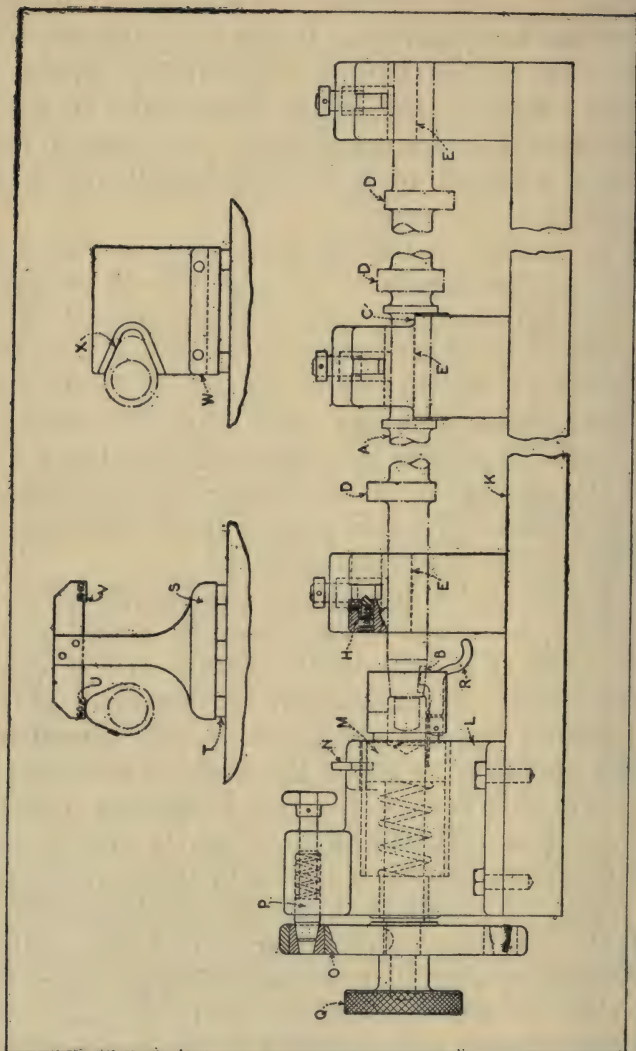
ELEVATION OF INDICATING GAUGE FOR AN AUTOMOBILE CAM SHAFT
